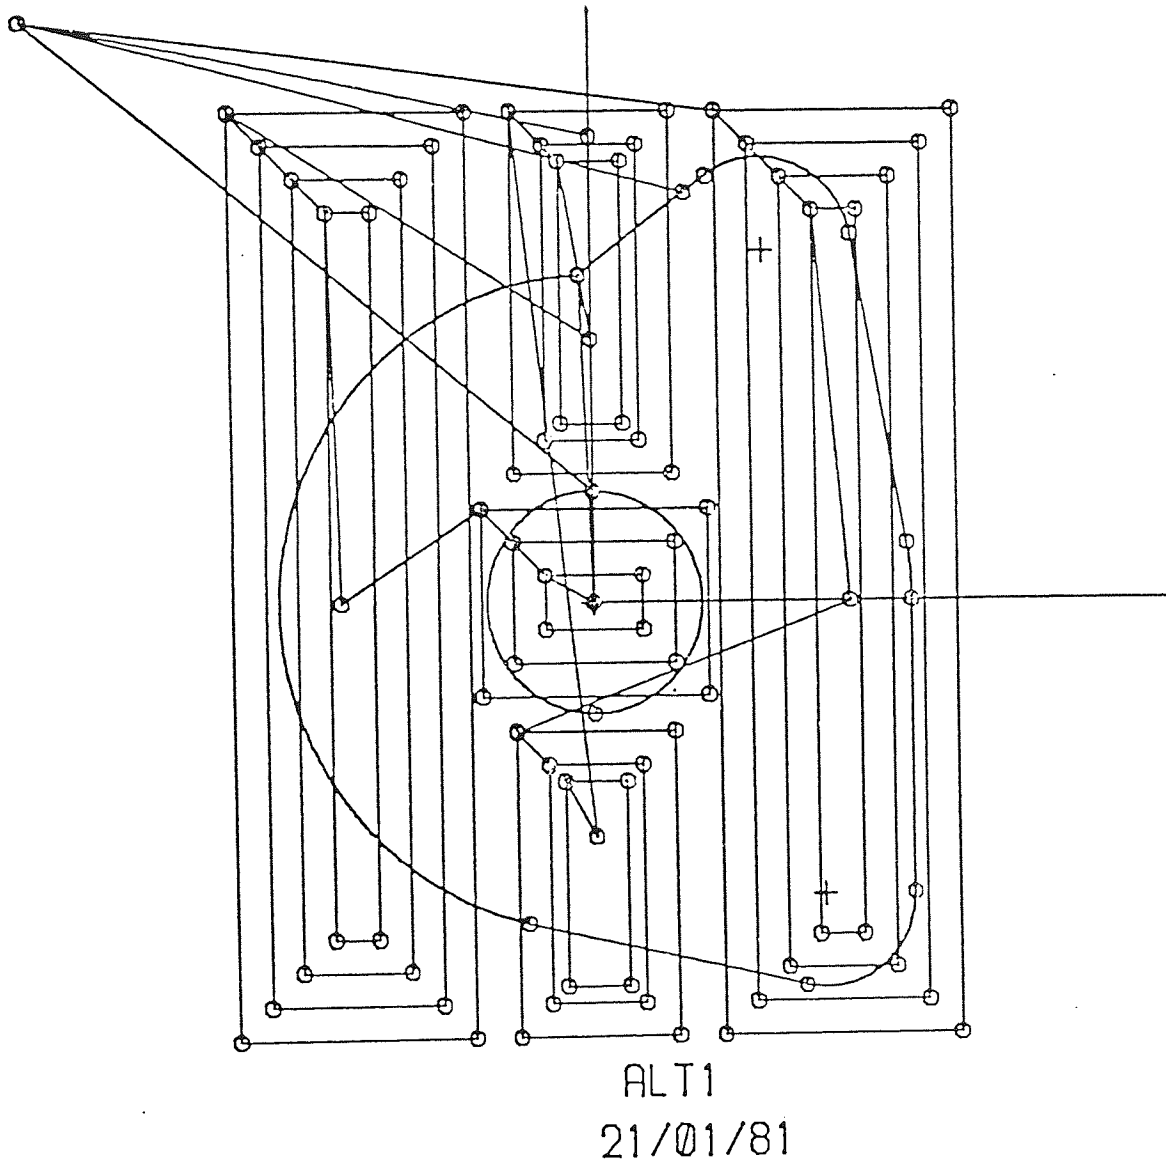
Perspective view of the cutter path (milling) of the alternator end-bracket
